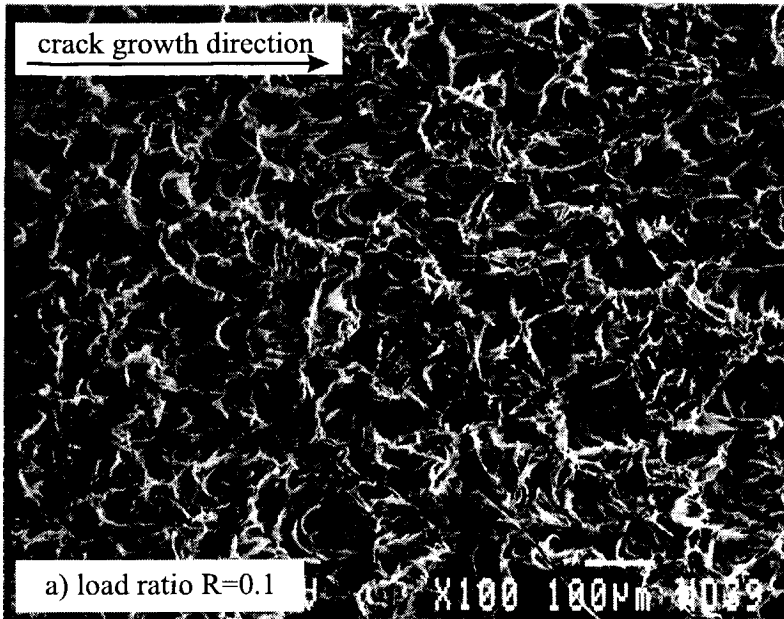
Fracture surfaces of extrapolation load series specimens of material T.
